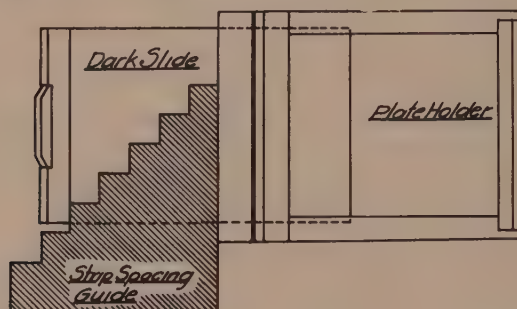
Sketch of plateholder showing how spacing guide is used for making test exposures of color plates.
